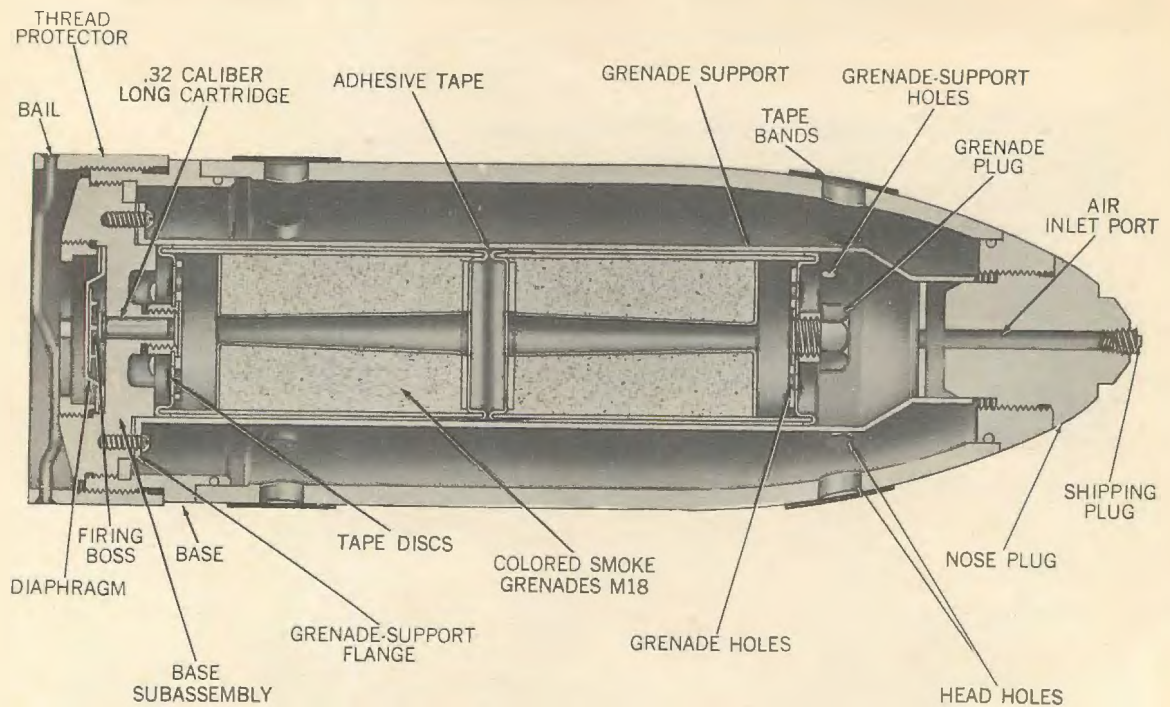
5.0-Inch Rocket Head Mk 21 Mod 1 (SMOKE-TAR), Partial Cross Section.
